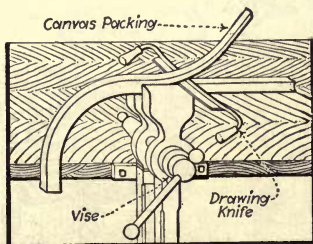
How Depth Of Canvas Piston-Packing May Be Cut Down.
